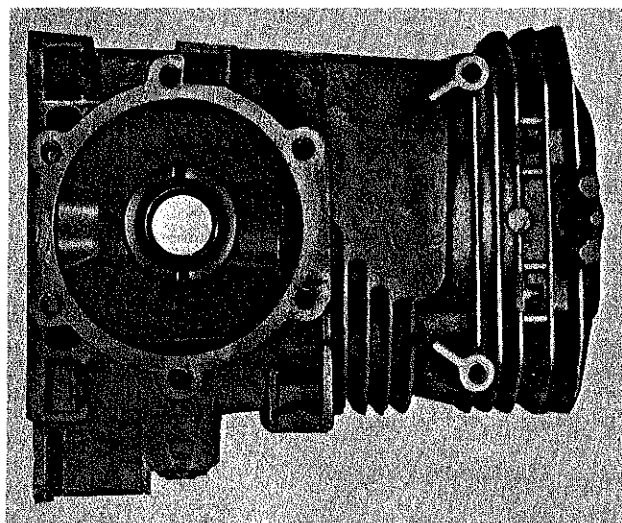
After removal of the crankshaft, the needle bearing, bushing, and oil seal will remain in the crankcase.
